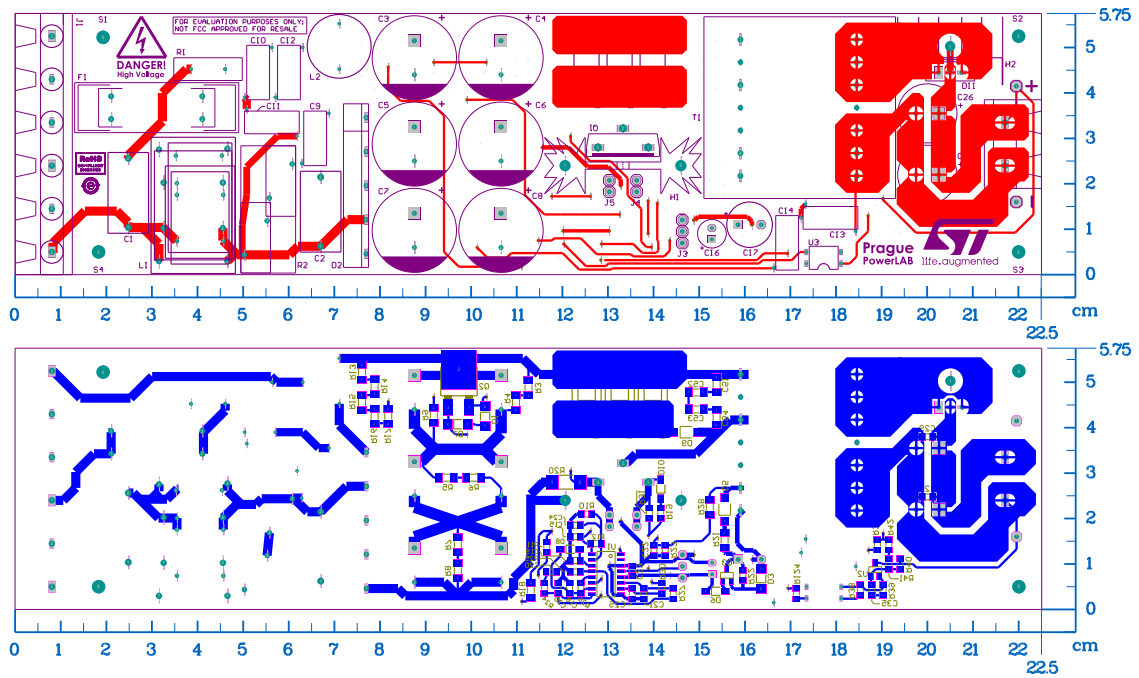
PCB layout for v1 - TOP layers are on the top, BOT on the bottom (not mirrored)
